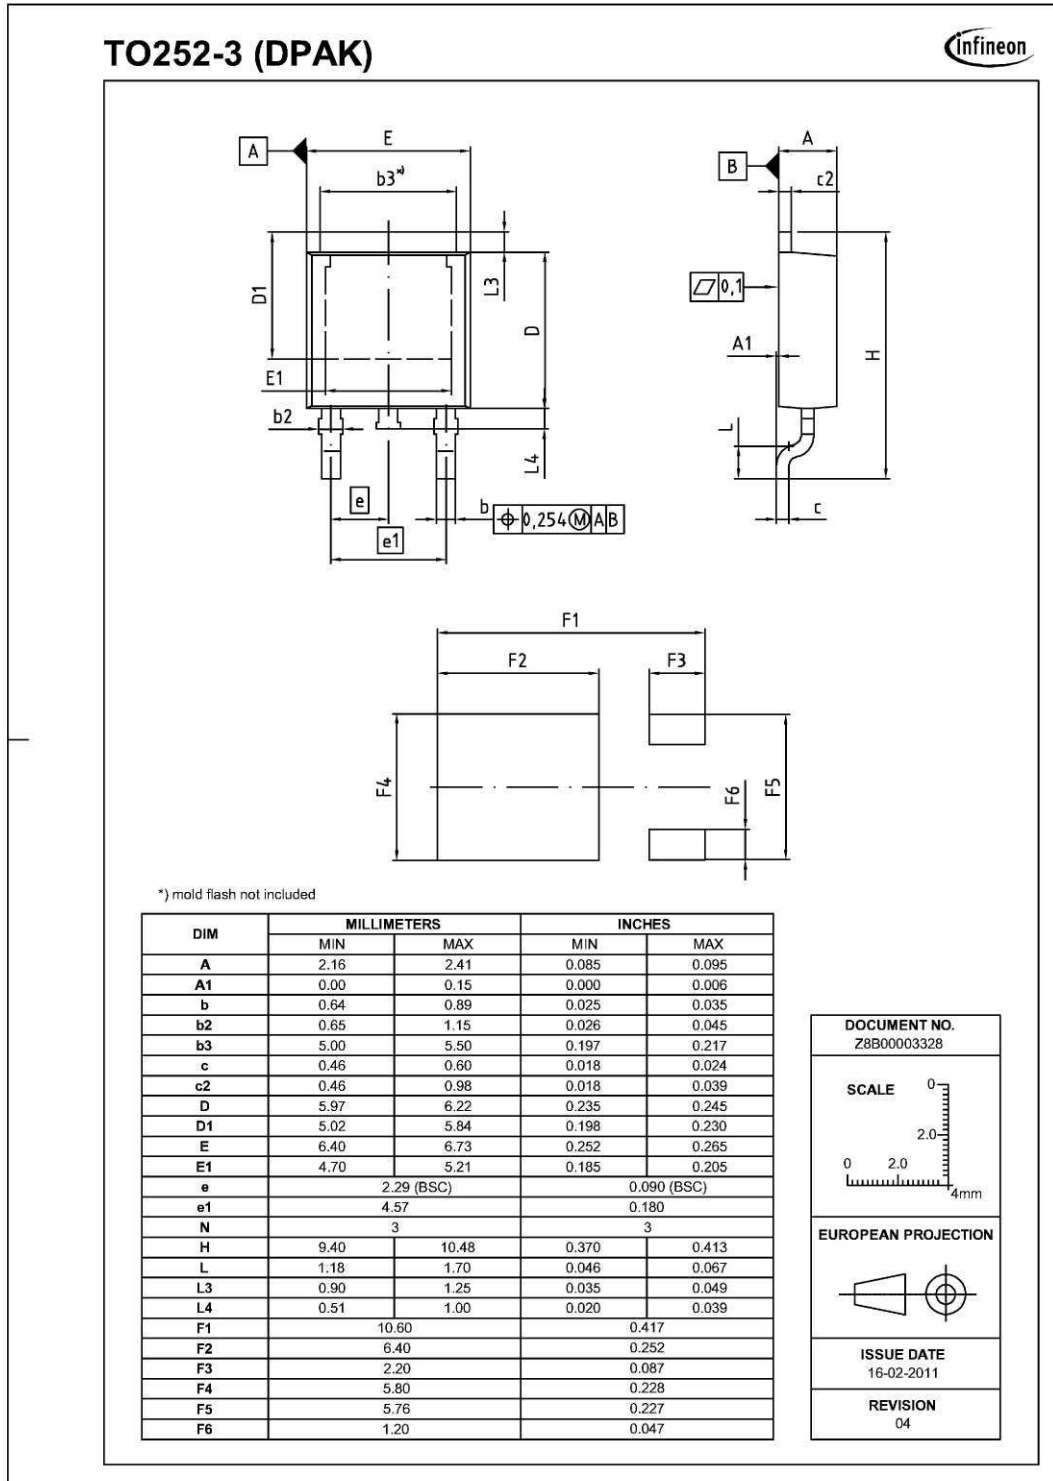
Outline PG-TO 252, dimensions in mm/inches
